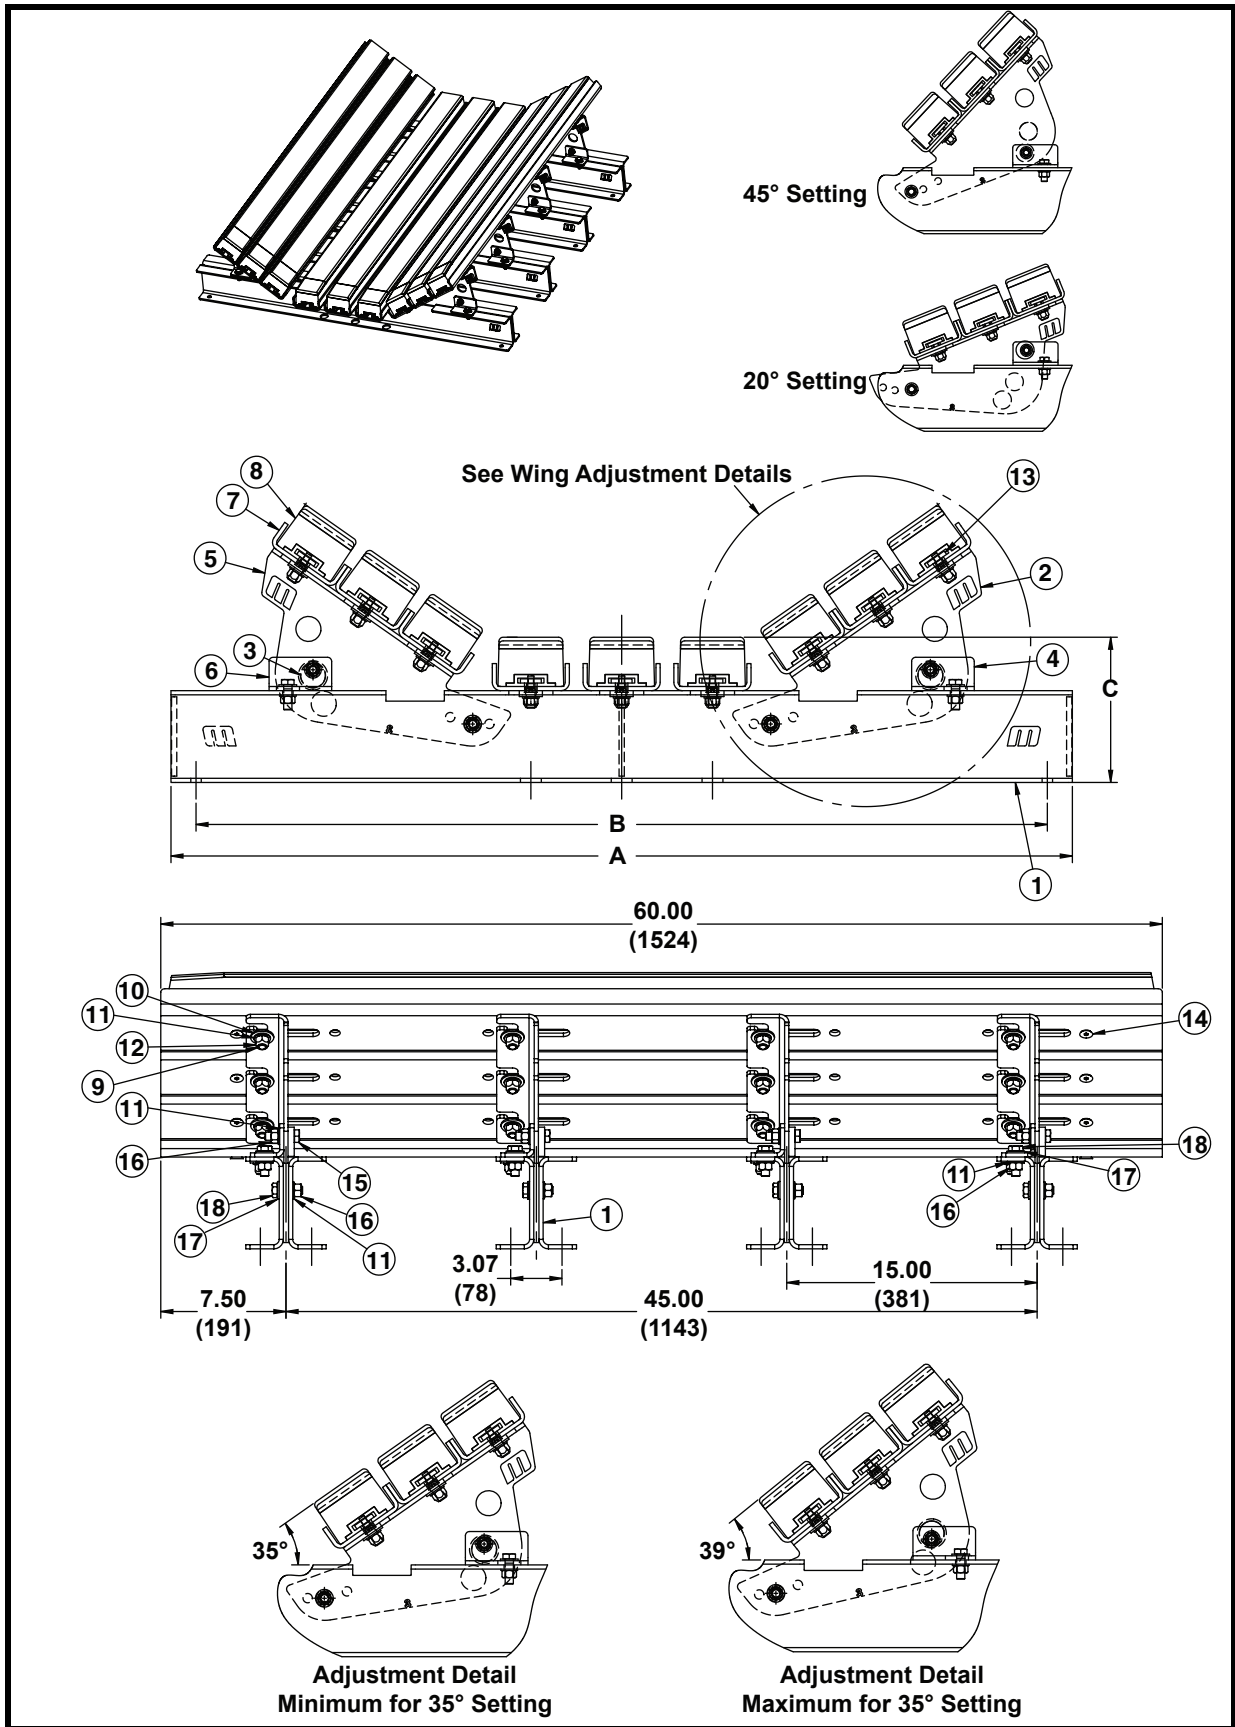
Martin® Impact Cradle MD Assembly with 5 ft. bars, P/N 36516-XXX (Sheet 1 of 2)
